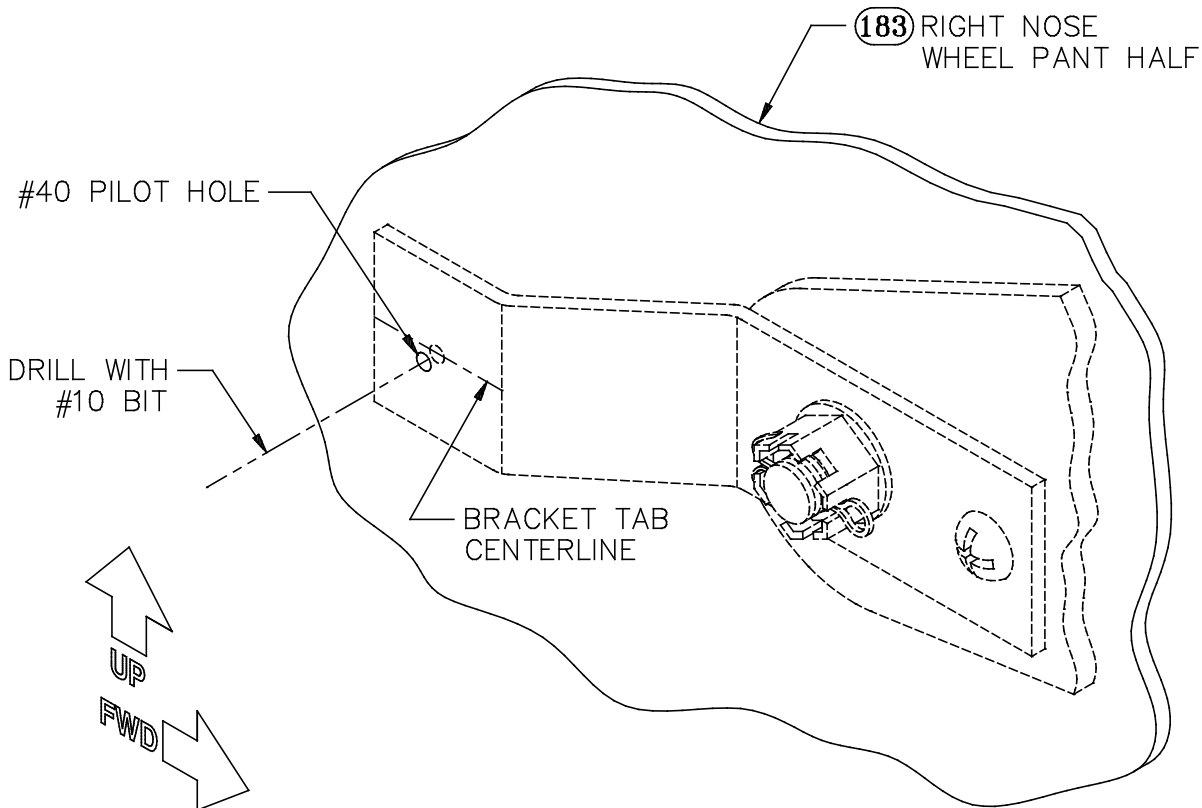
Aligning and Drilling the Aft Wheel Pant Mounting Hole
